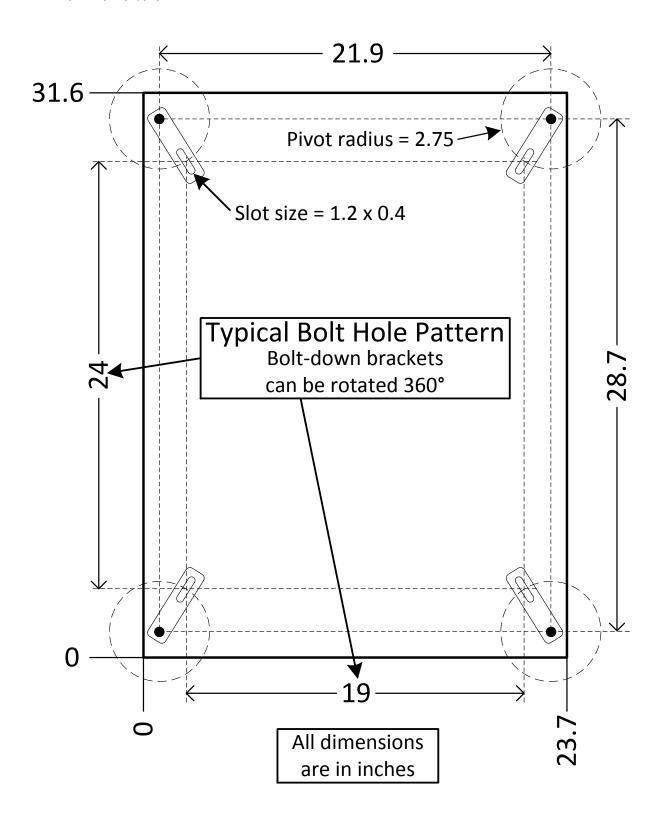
A. Rack Cabinet Mounting Hole Locations
